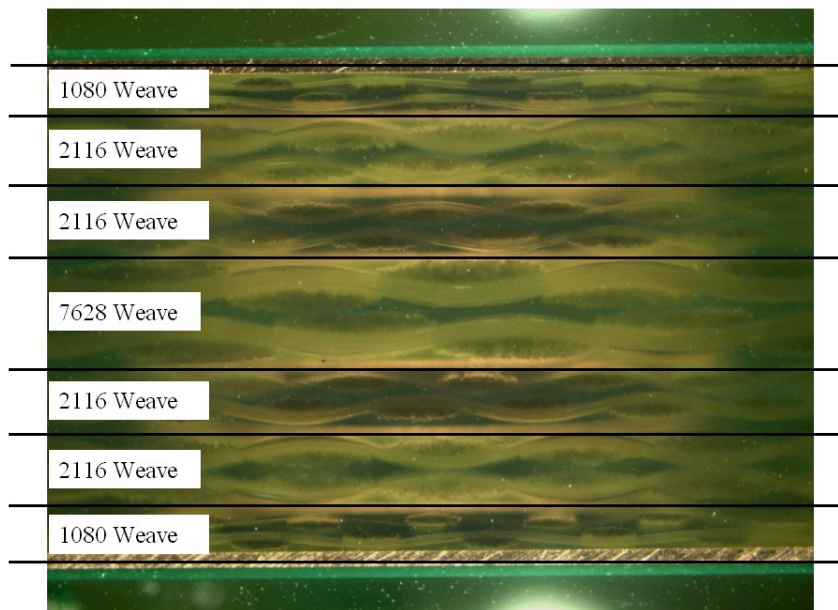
Optical dark field photo showing a cross-section of the test board's internal layer stack up
